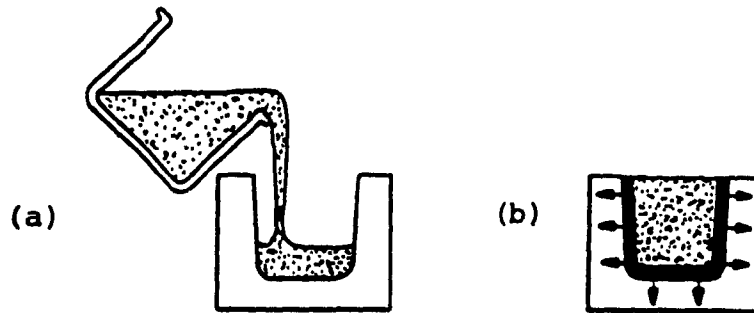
Slip casting: (a) fill mold with slip; (b) mold extracts liquid, forms compact along mold walls (After Ref. 4).
